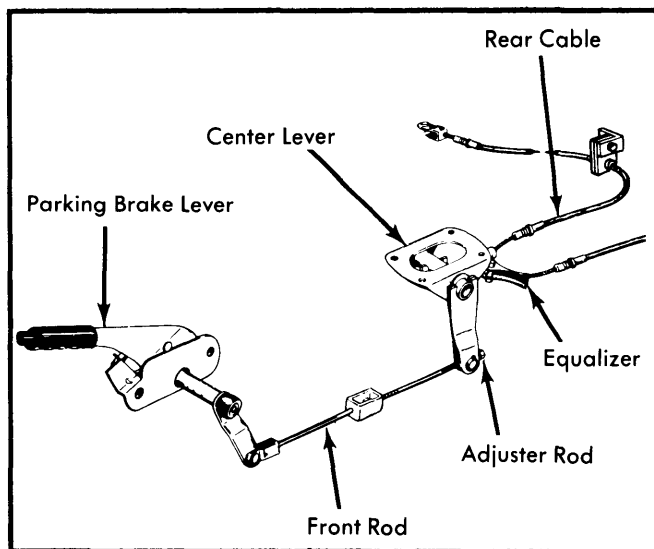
280Z Parking Brake Adjustment Point Adjuster Rod
